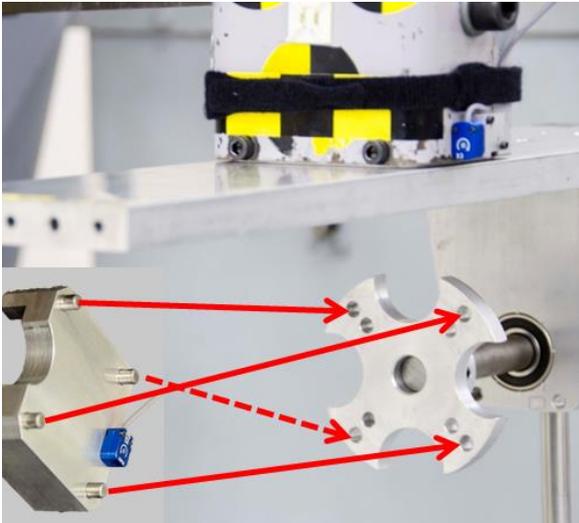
Alignment of neck mounting adapter locator pins with neck attachment plate locator holes
